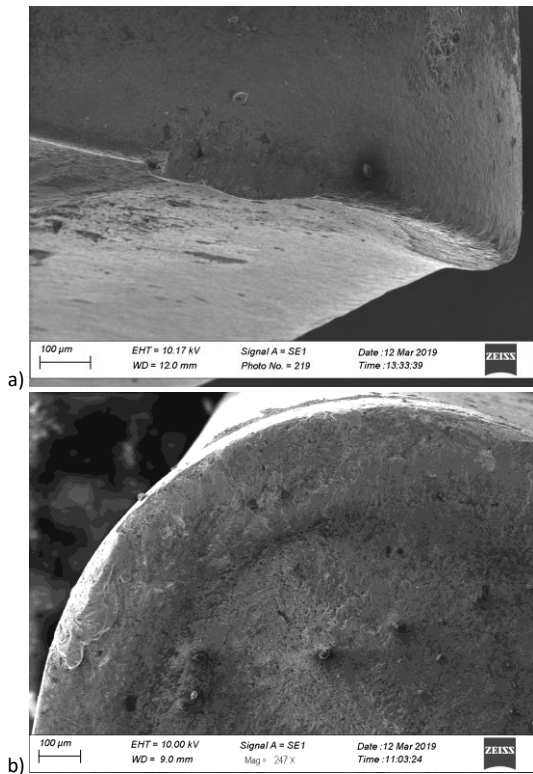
The microscopic view of flank (a) and rake face (b) wear for CCMT 09T304-UM 2025 cutting insert
